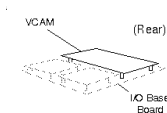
System Board - VME Channel Adapter Module (VCAM)
